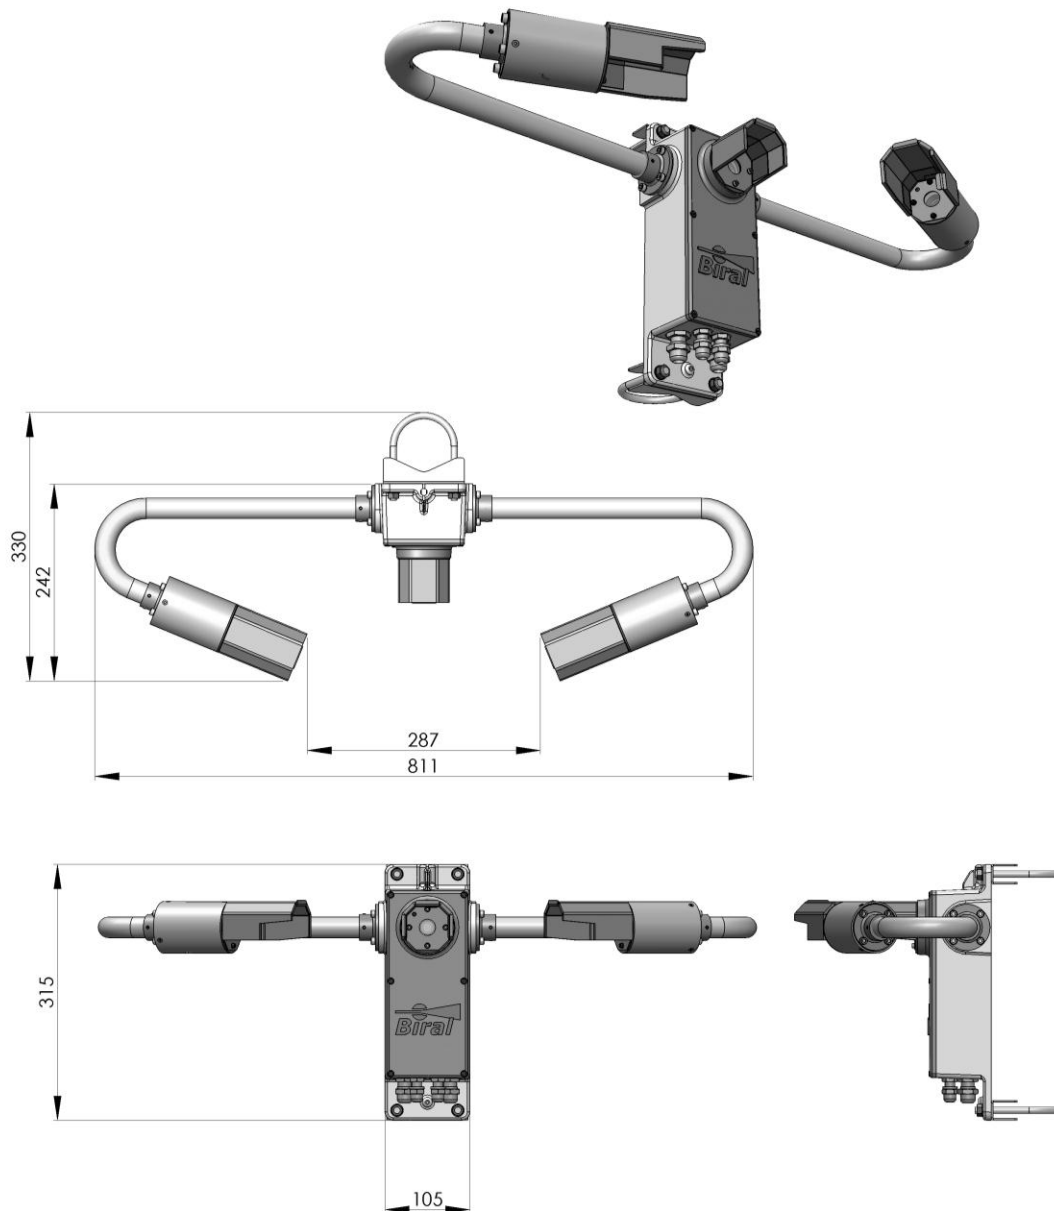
External Dimensions of SWS-sensors (Dimensions in mm)
